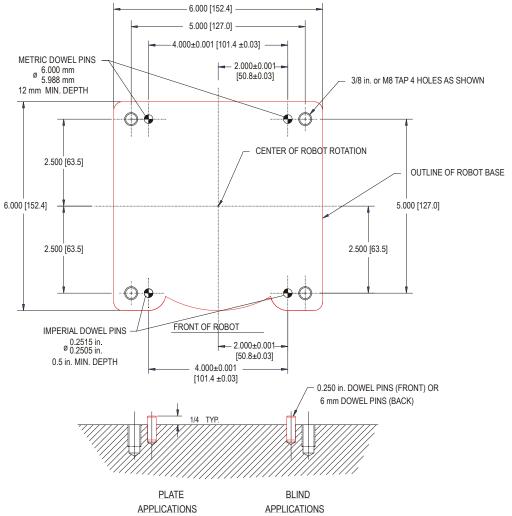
Mounting template for the CRS CataLyst-5 arm
